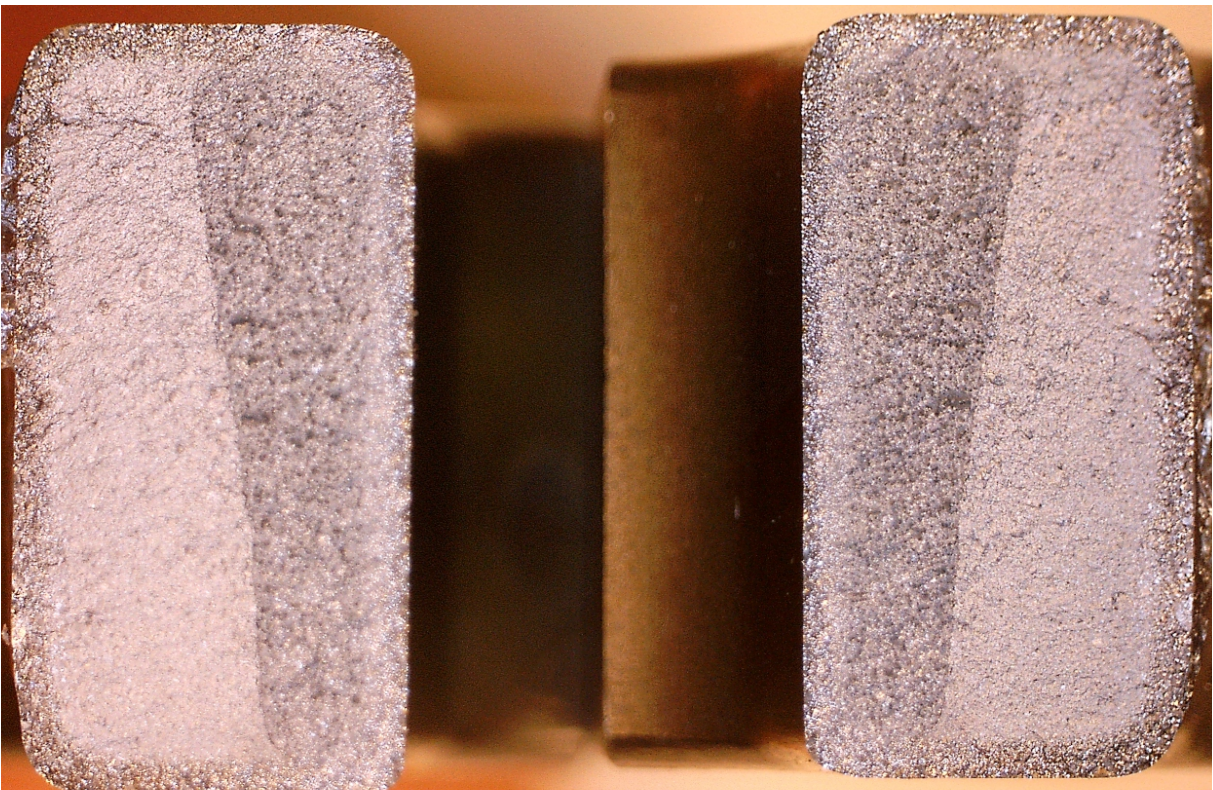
Fracture surface of specimen IT201A-16, 2Nf=98,904
